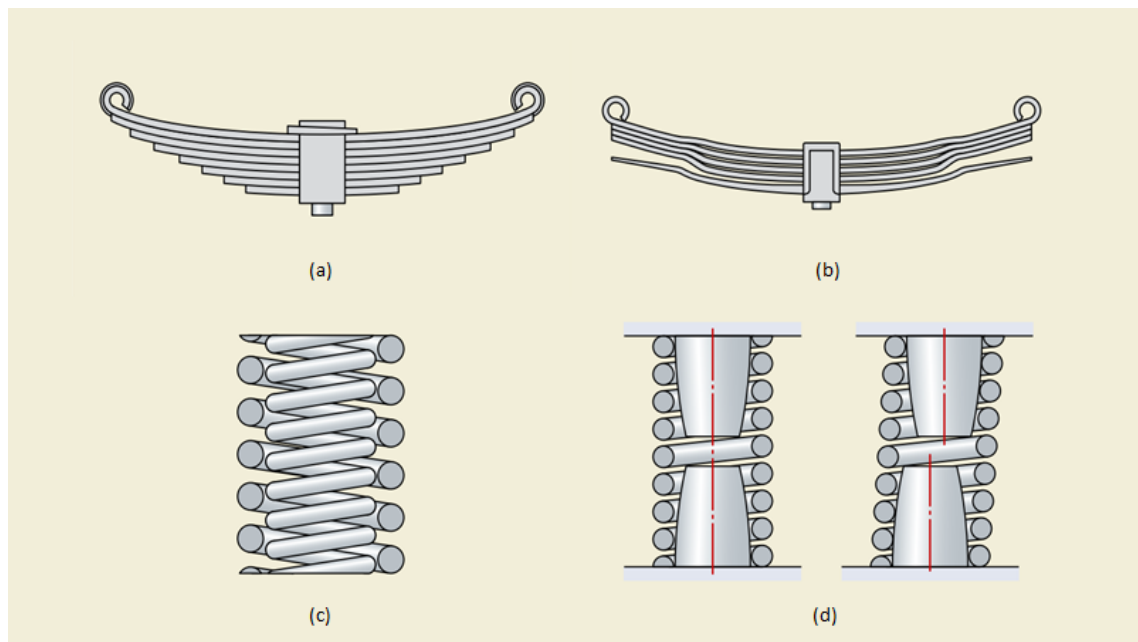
Types of steel springs: (a) leaf spring; (b) parabolic leaf spring; (c) cylindrical helical springs; (d) flexi-coil cylindrical helical springs (Adapted from [26]).
